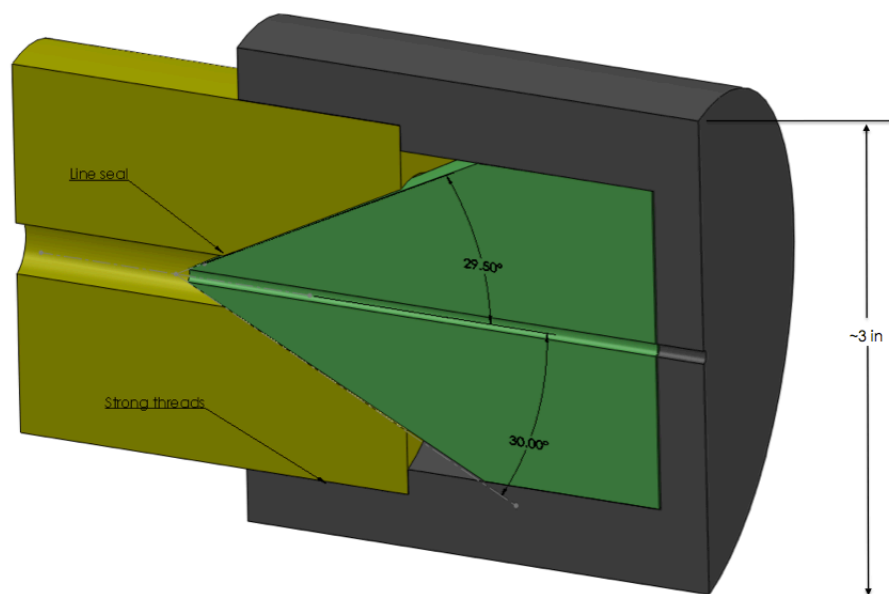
A section view depicting the form of the Tuttle cold-cone seal, in its three parts. In the middle is the cone itself, machined to a half-angle of 29.5° . The autoclave body—the left-most component—has a conical seat machined to a 30° half-angle, in to which the cone fits. Owing to the slight difference in angles, however, they only touch at a circular locus, forming a line seal. Assembly is clamped together by the retaining cap via the screw threads indicated. The channel leading through the cone and cap are provided for the addition of a pressure gage and burst disk assembly.
